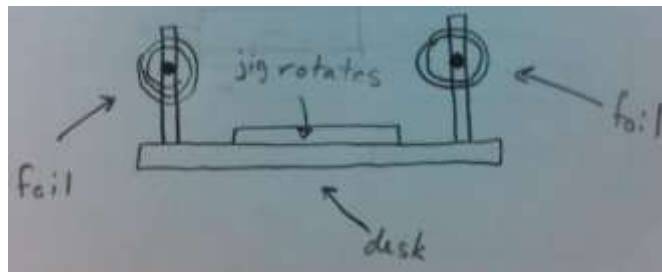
One foil roll holder on each end with a rotating jig.
